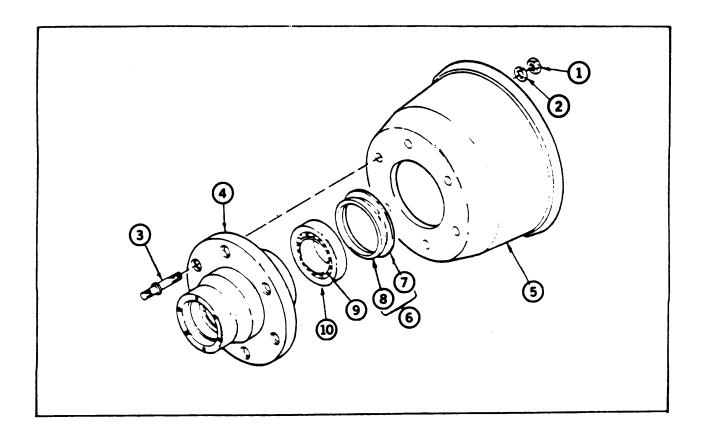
Trailer Hub and Drum Assembly (ARMY)
